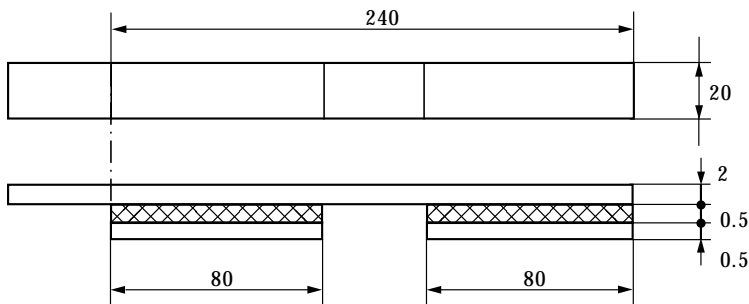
Discontinuous cantilever sandwich beam tested (unit: mm).
